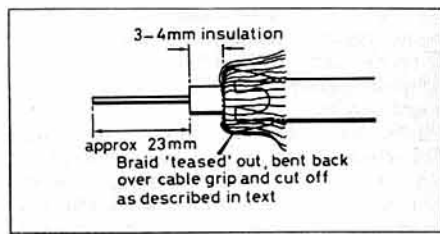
GM3CSM recommends inserting the braid with the centre conductor and insulation through the cable grip when fitting TV-type co-axial plugs. For details see text.
